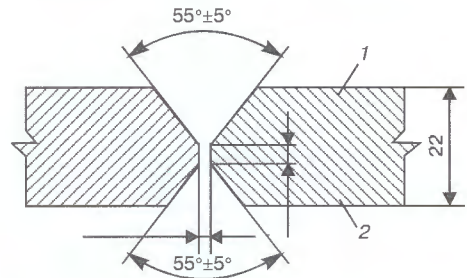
Groove preparation in lobes for welding using a manipulator: 1 — vacuum; 2 — manipulation environment
